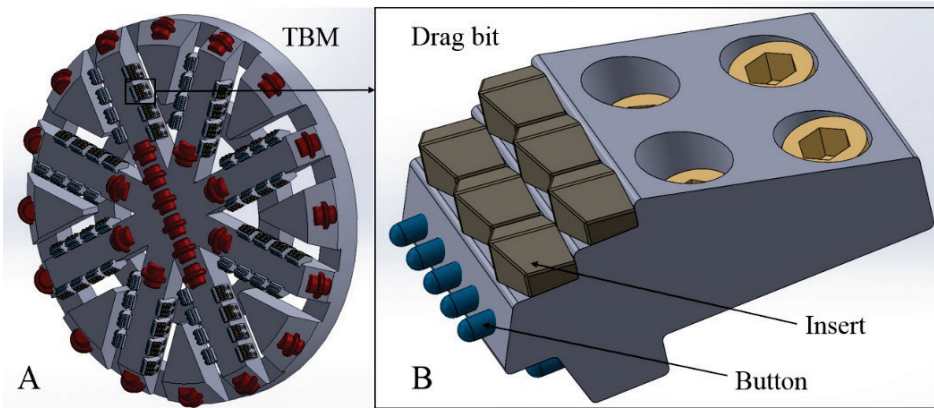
A) Schematic of tunnel boring machine cutterhead; B) Position of buttons and inserts in the drag bit (TBM diameter is 3000 mm, drag bit dimension is 195×115×90 mm) [Publication 4].
